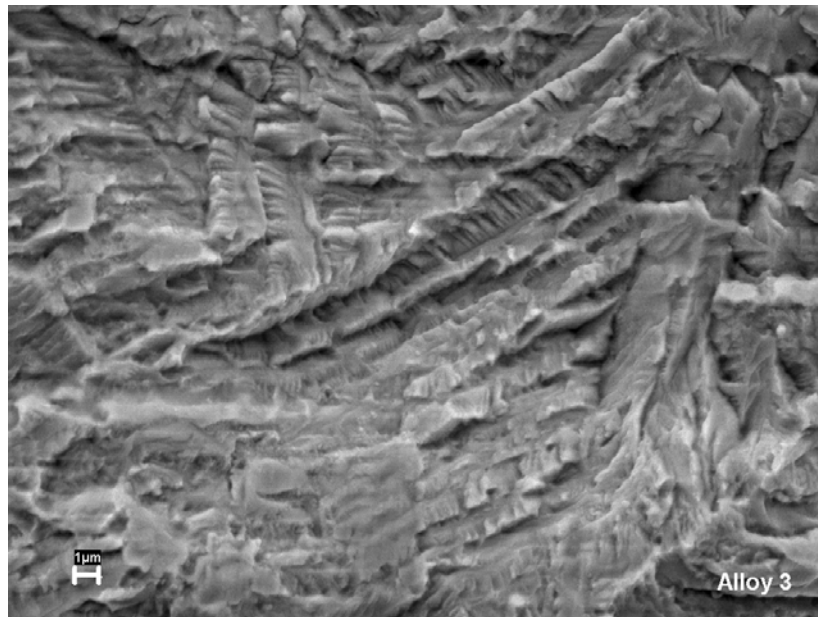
close-up of fracture surface, can be clearly seen the needles and can be recognized the ductile fracture.
